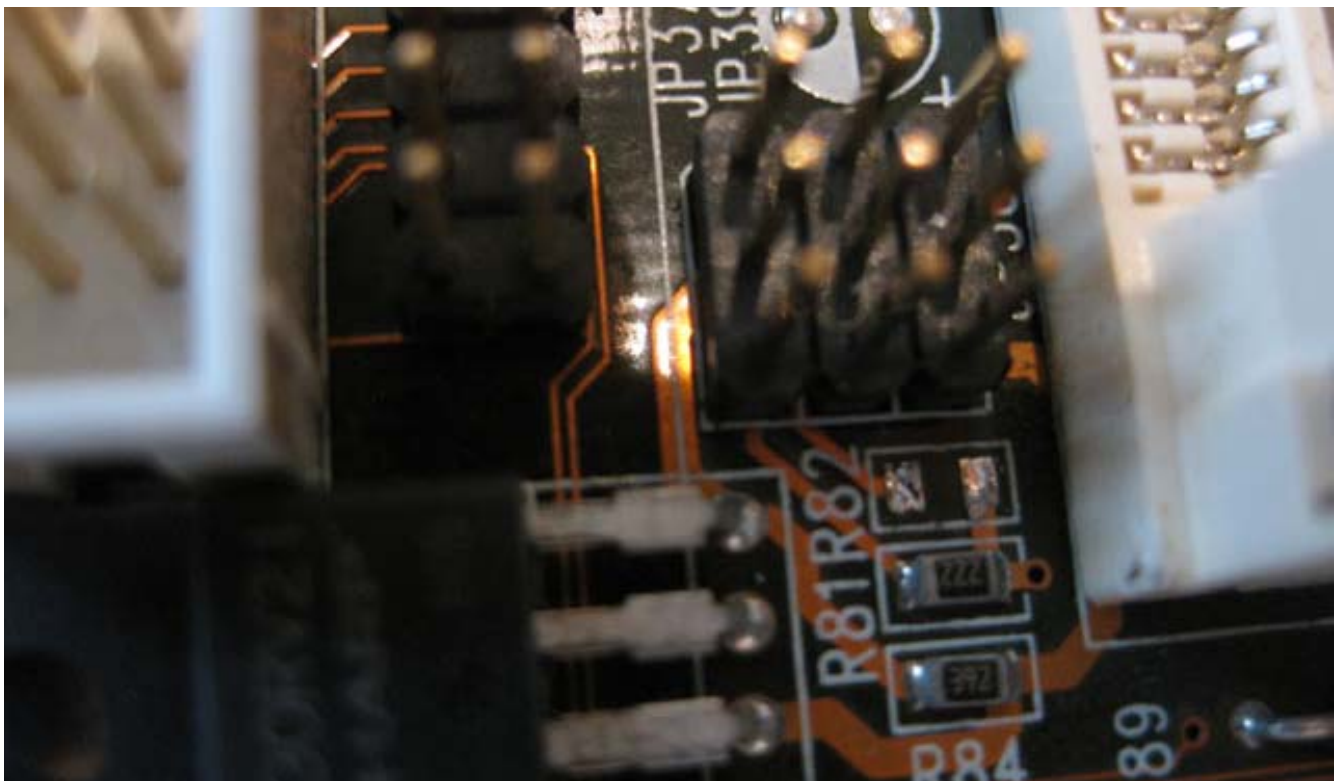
The removed SMD resistor and empty solder pads. These empty pads will be used to solder in the 5 K Ω trimmer.
